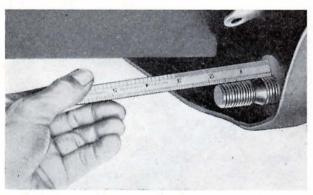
Checking the location of the lower fulcrum shaft in the crossmember
